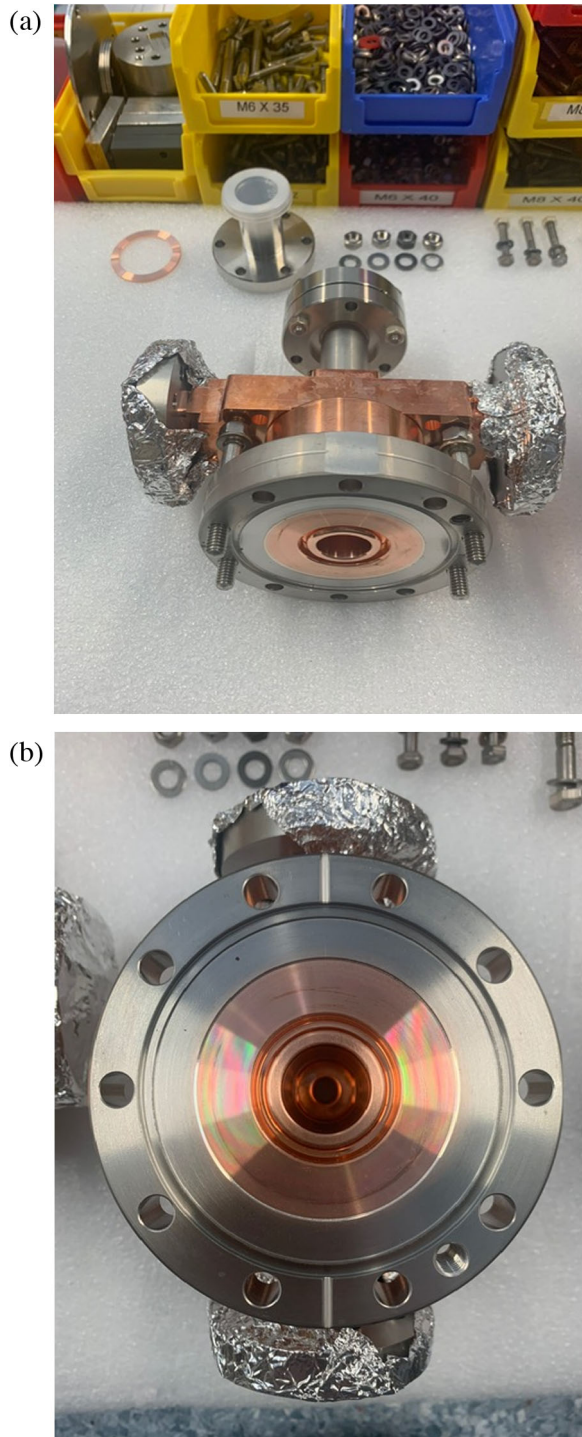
Prototypes of the mode converter with half-choke geometry (a) and conflat flange (b).
